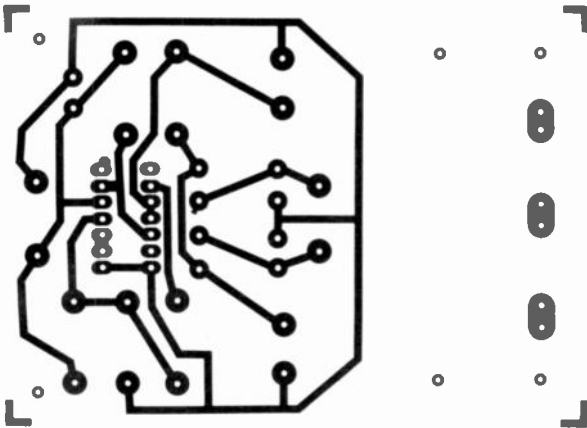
POWER SUPPLY printed circuit board shown full-size.
